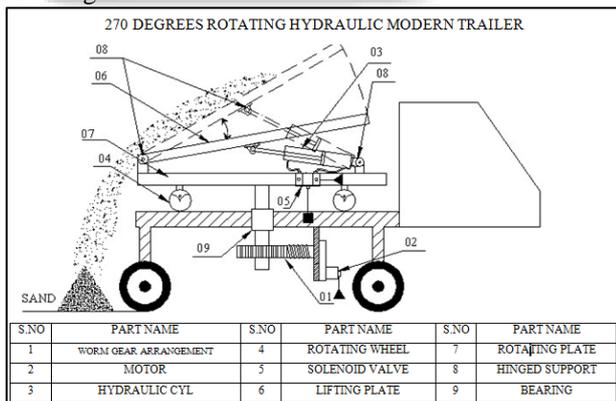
270 Degrees Rotating Hydraulic Trailer System
